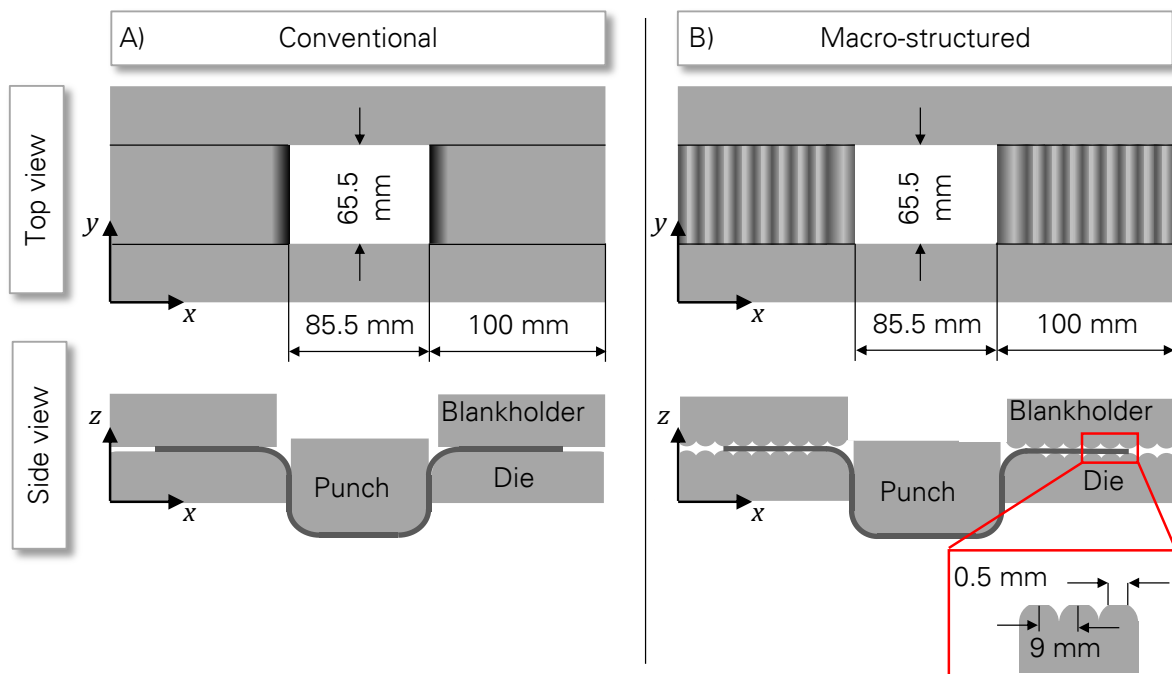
Geometry and dimensions of A) conventional and B) macro-structured draw bending of U-Channel forming tools
